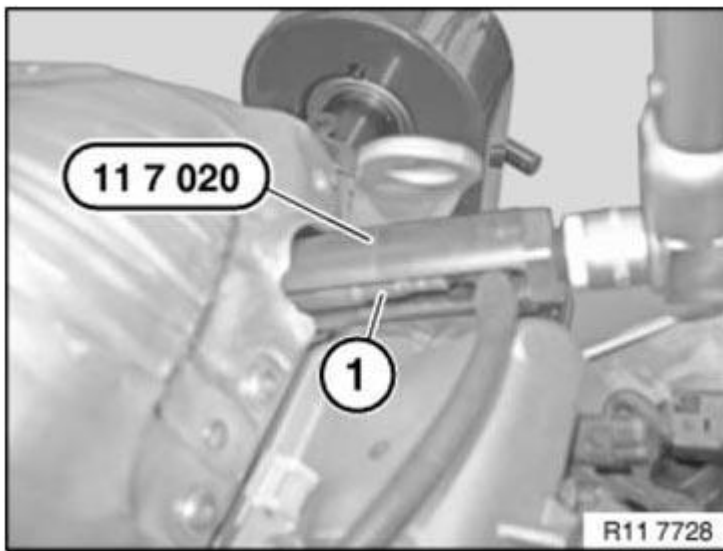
Tightening Monitoring Sensor Using Special Tool 11 7 020
